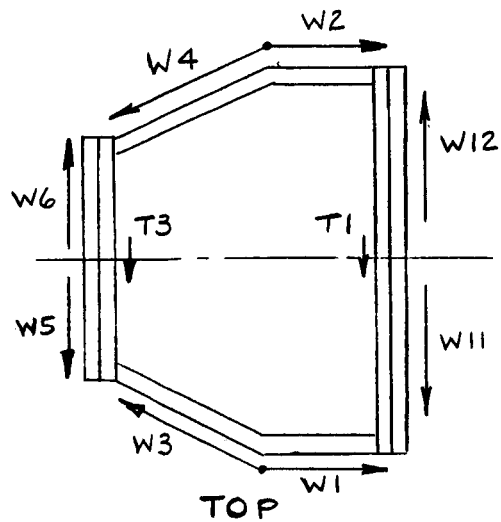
Internal Diameter Measurements On Practice Weld Turbine Casing
